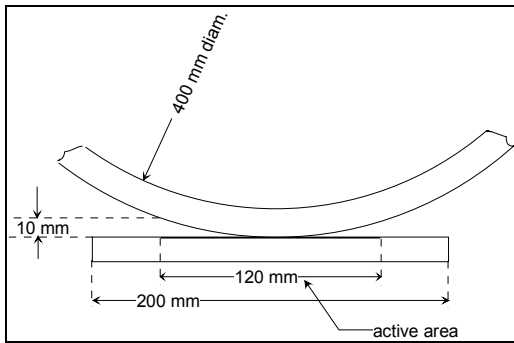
Geometrical situation in the case of circumferential welds inspected by flat panel detector
